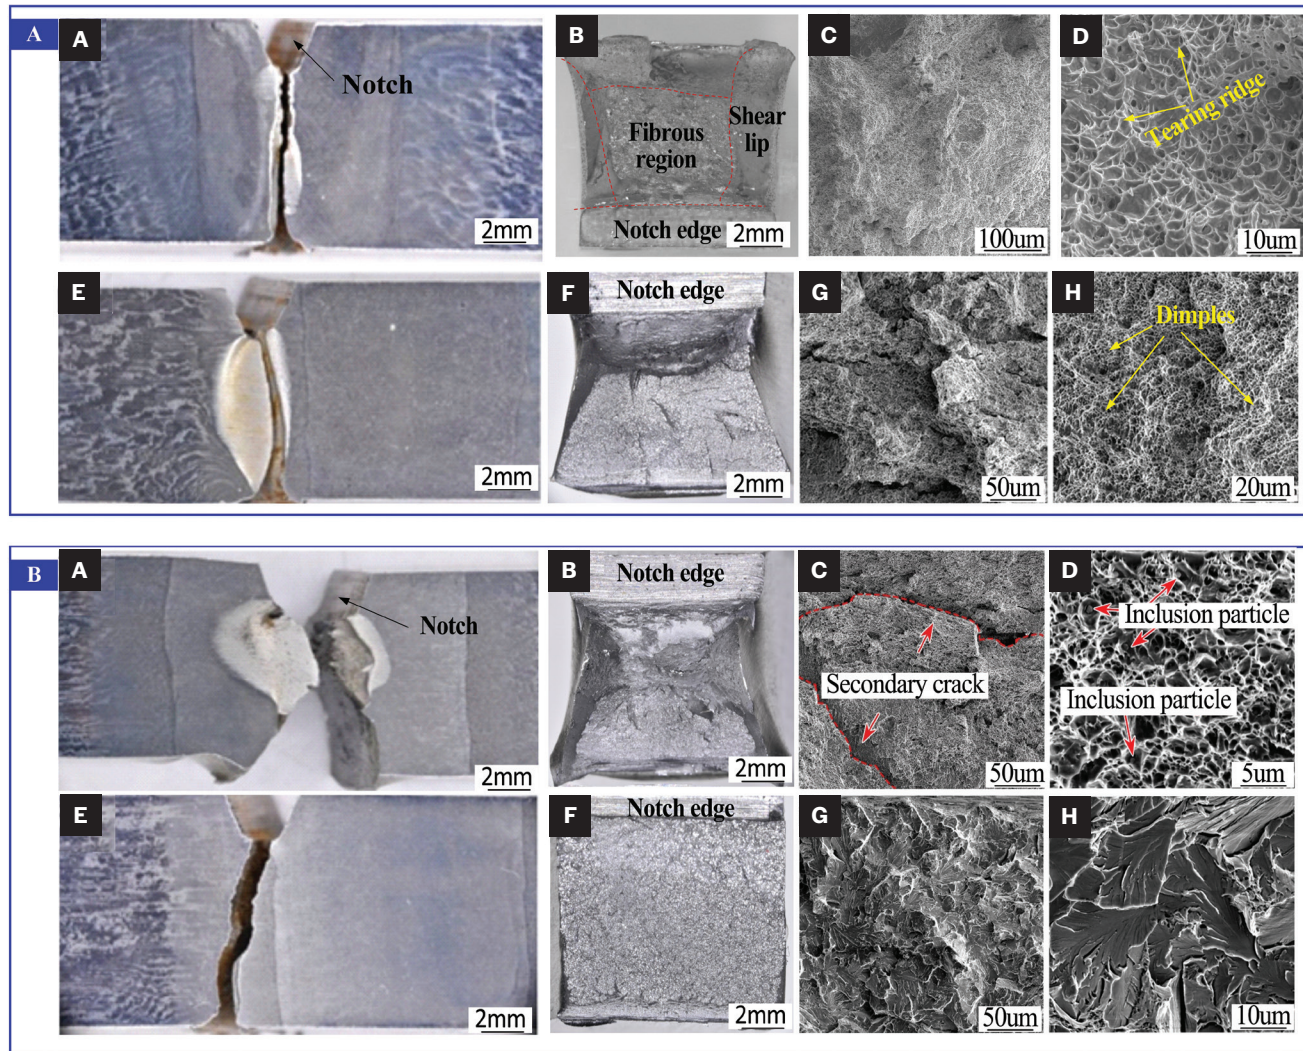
Impact fracture morphology: A – With two filler passes welding (Experiment 3); B – with one filler pass welding (Experiment 1).
